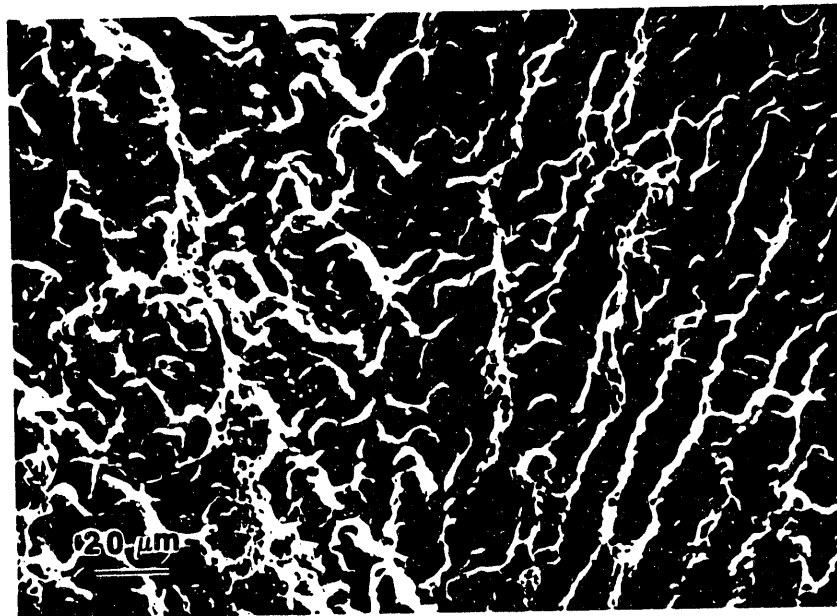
SEM micrograph of weld crack surface. Appearance indicates liquid was present during crack formation confirming that this is a solidification crack.
